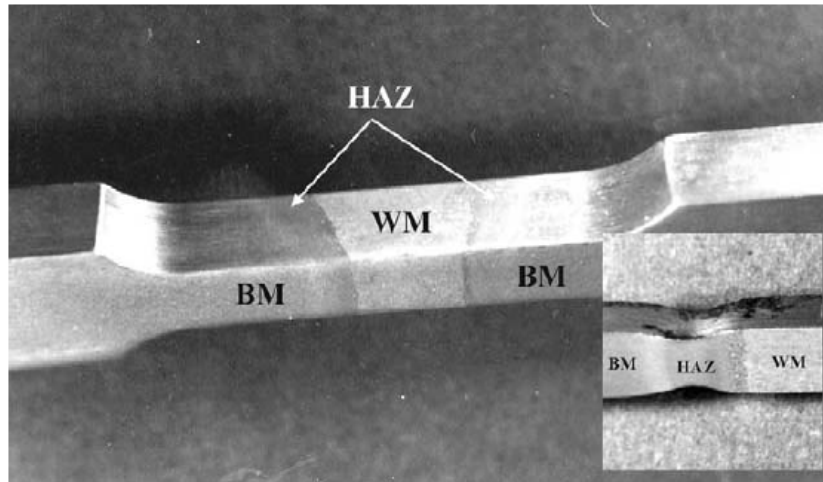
Constitutive weld zones of a tensile test specimen and resulting deformation in HAZ [41].
